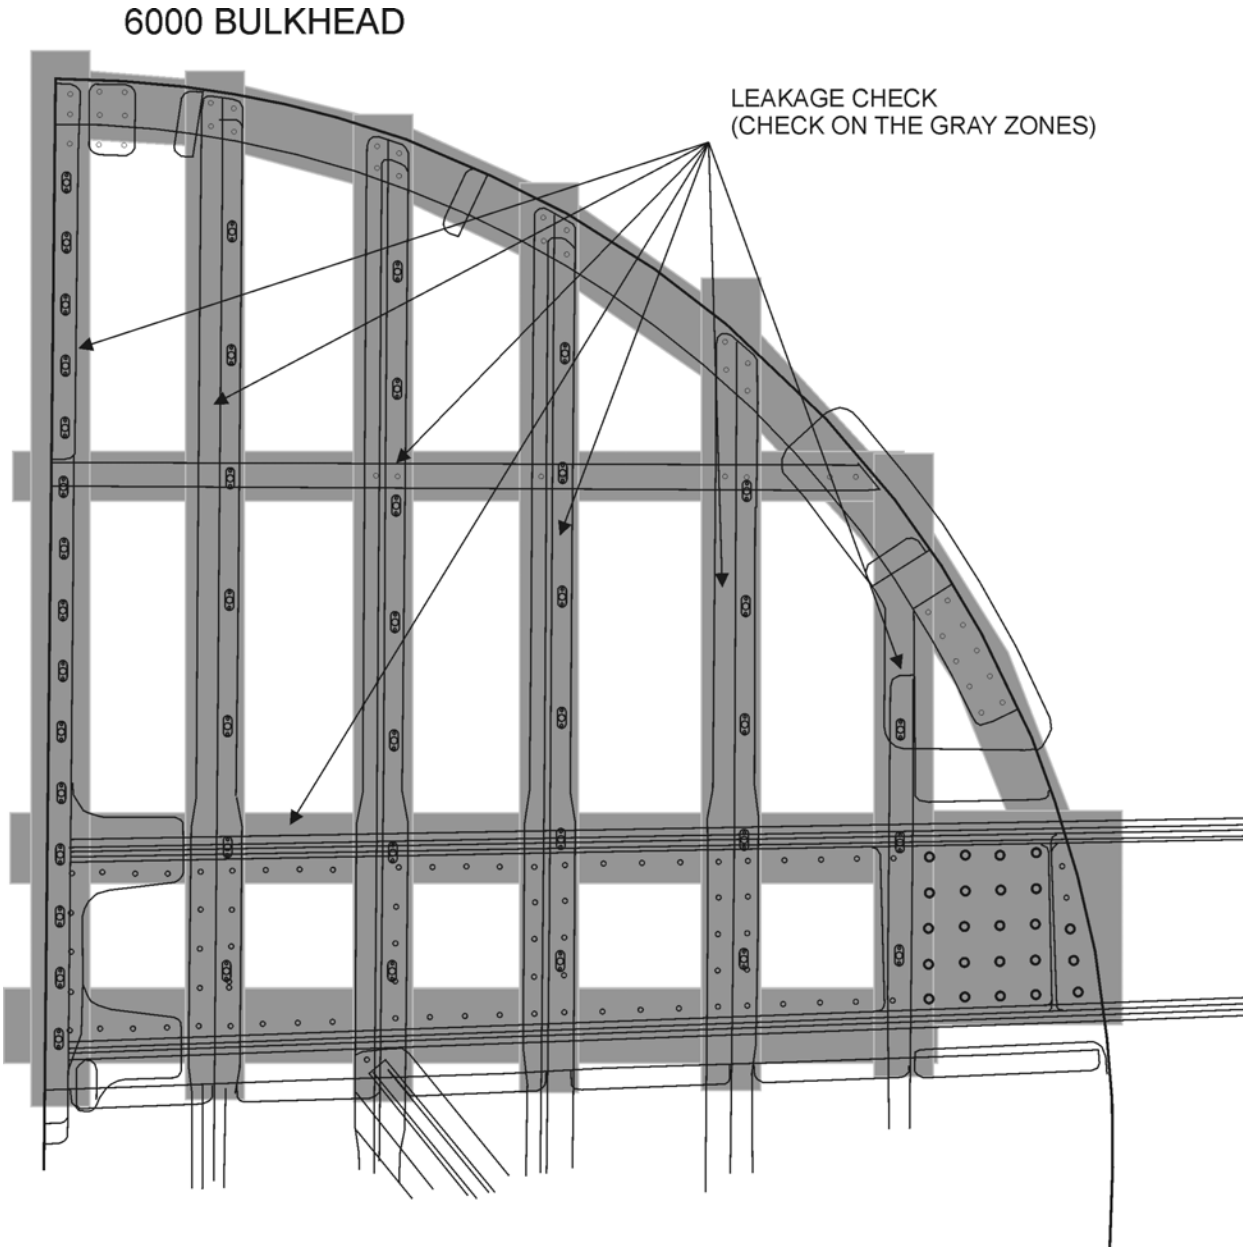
Fuel Fuselage Tank 6000 Bulkhead - Leakage Check (Sheet 2 of 2)
